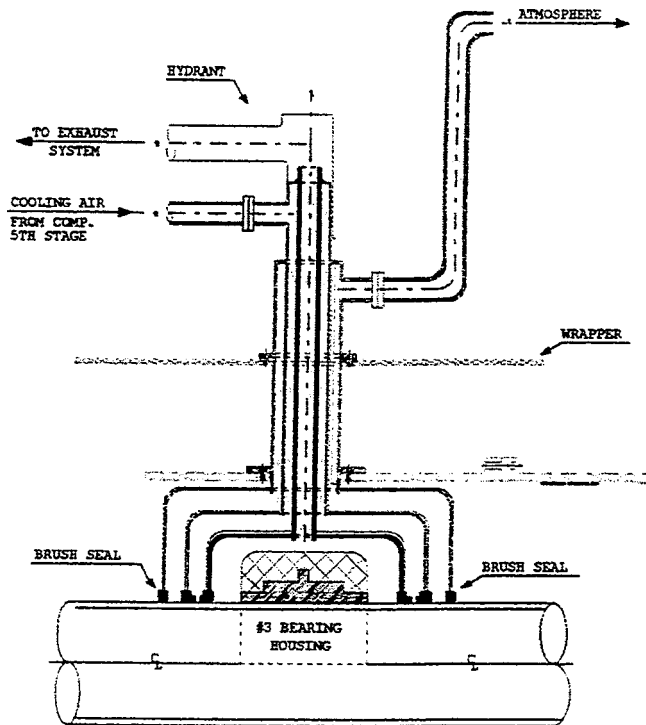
The Third Bearing Located Between the Compressor Discharge and Turbine Inlet Locations. (Courtesy ASME)
